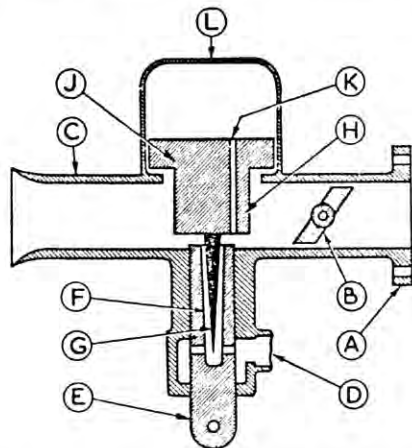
Basic S.U. layout. A=Mounting Flange, B=Throttle Valve, C=Air Intake, D=Fuel Intake, E=Jet Head, F=Jet, G=Needle, H=Air Slide, J=Piston, K=Air Passage To Suction Chamber, L=Suction Chamber.
